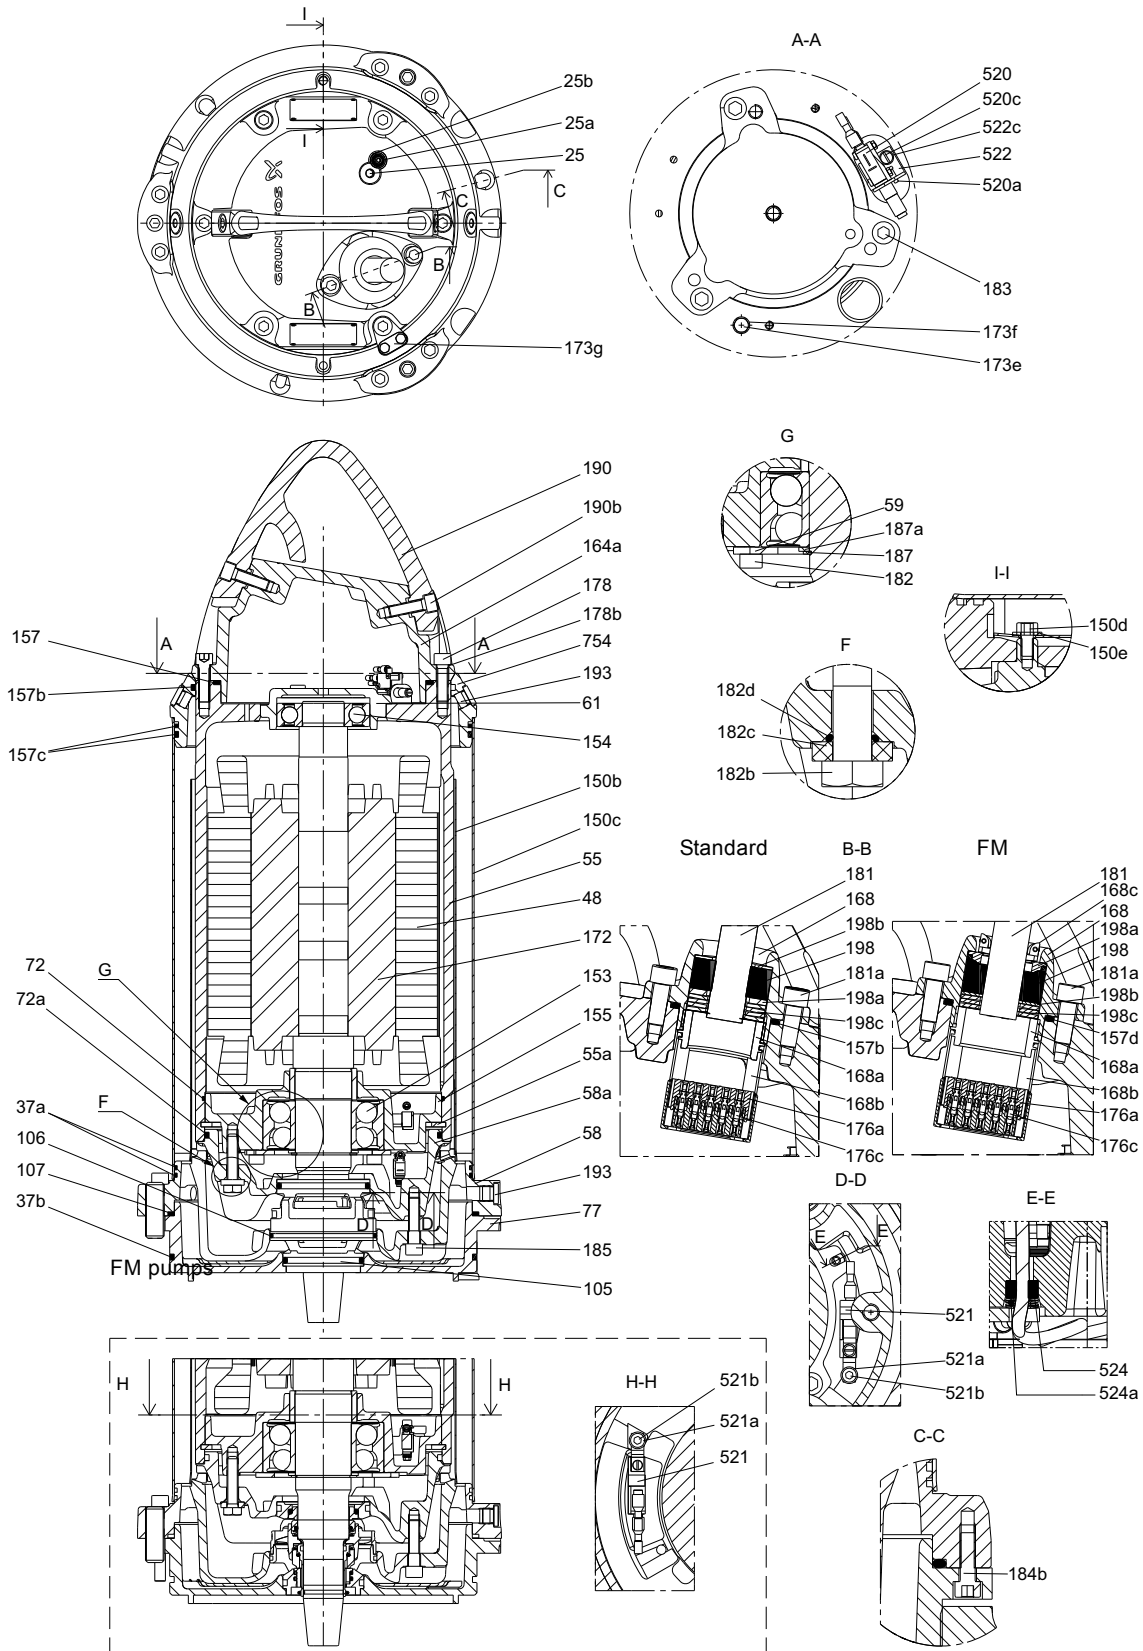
Sectional drawing, SE pump with cooling jacket, 2-4 poles
